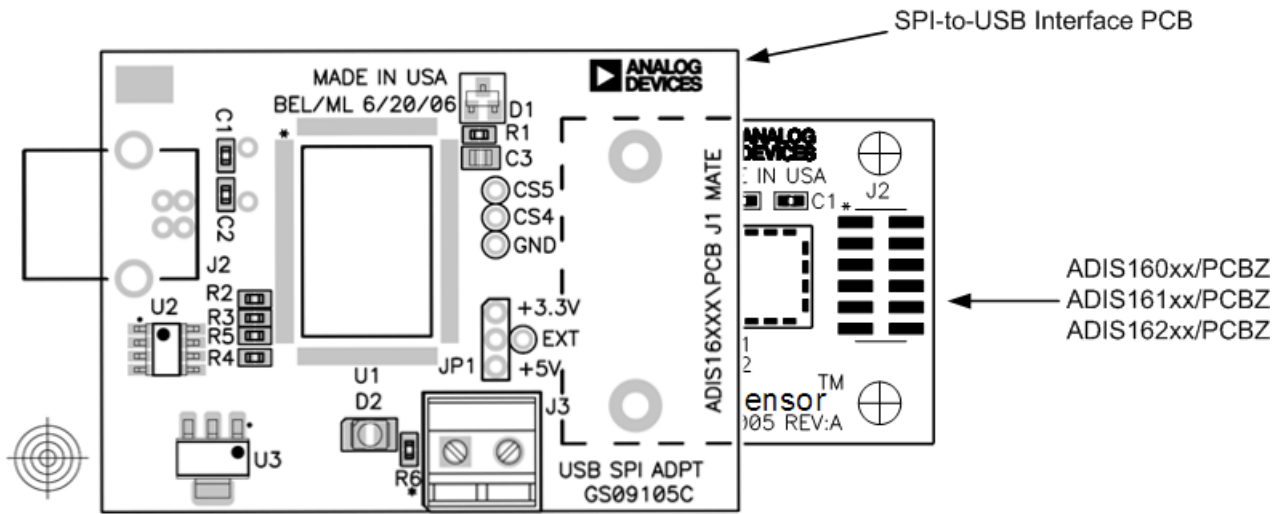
USB Interface PCB connection with ADIS160xx/PCBZ, ADIS161xx/PCBZ, ADIS162xx/PCBZ, Top View
